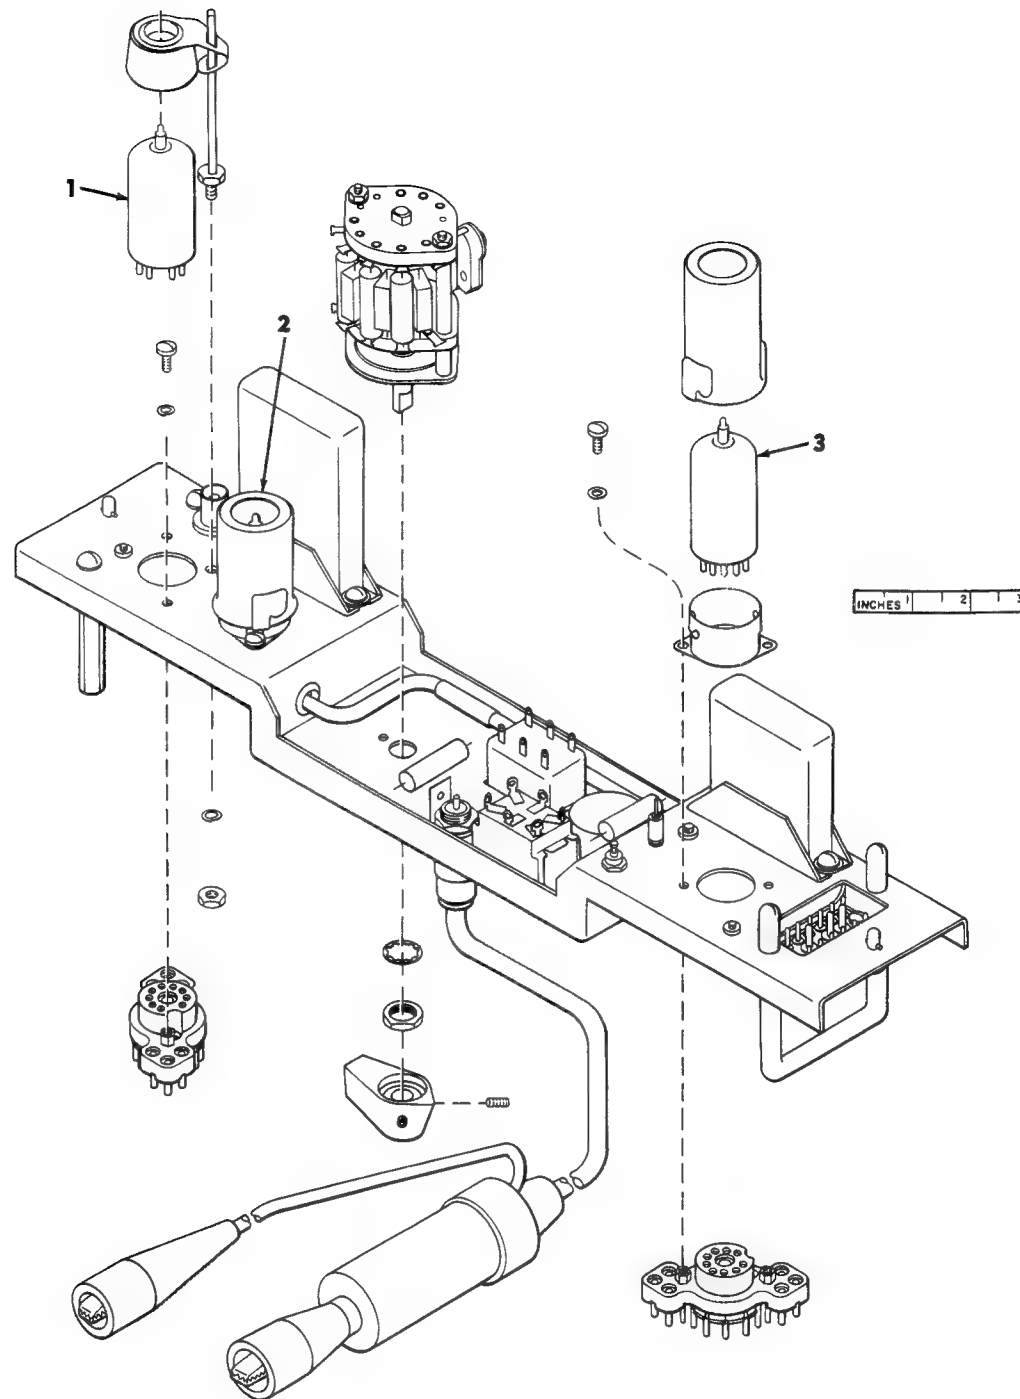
Generator, pulse O-305/M and O-306/M (8007727 and 8007728)—partial exploded view
